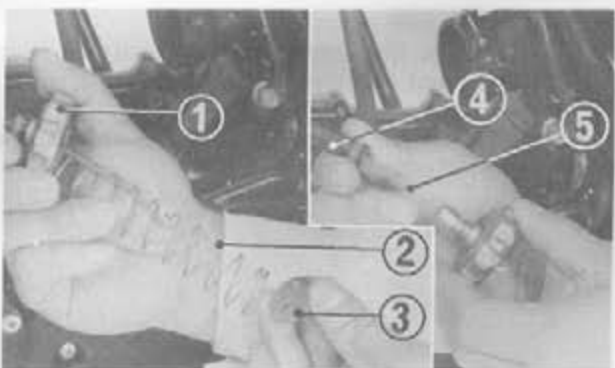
(1) Carburetor top (4) Rubber cap
